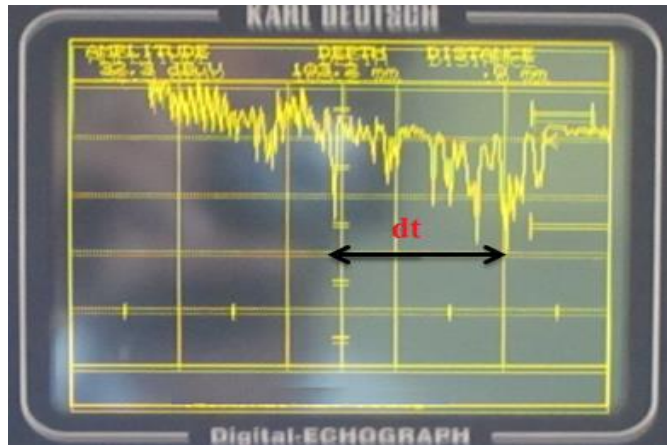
UT for rail-weld at base using 60° transducer.
